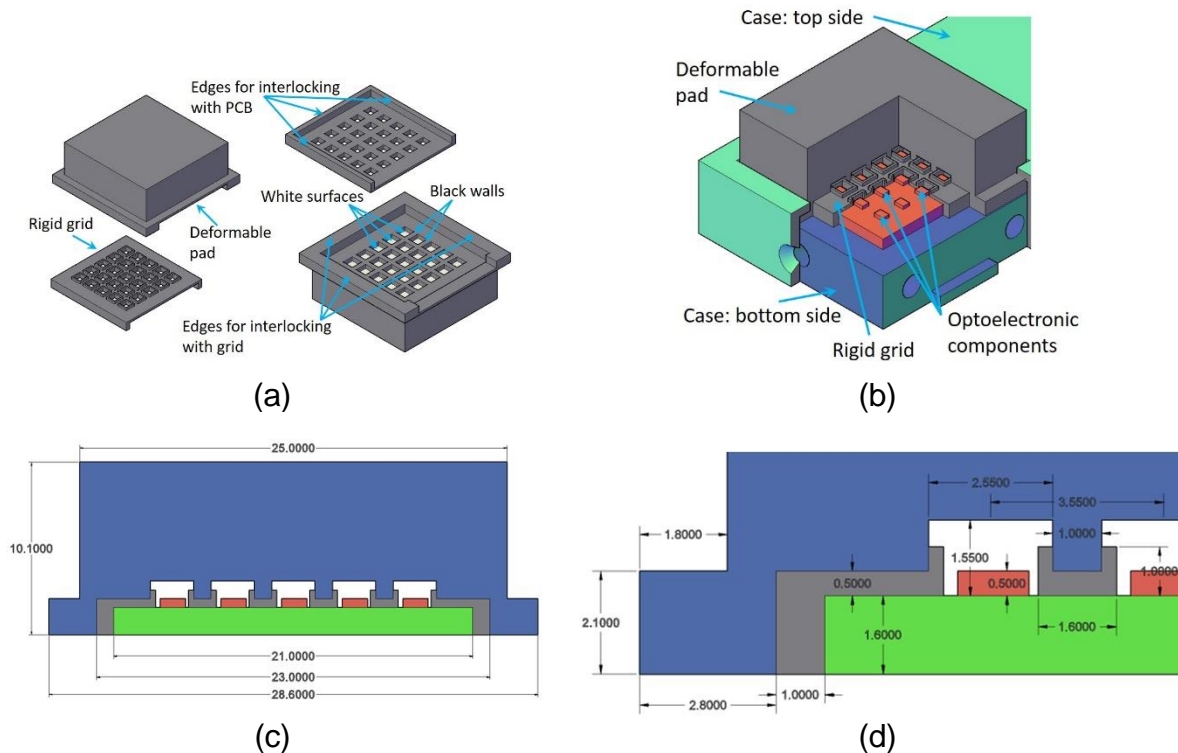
Deformable layer and rigid grid characteristics (a). Mechanical assembly of mechanical and electronic parts (b). Section of the assembled parts with dimensions: full view (c) and zoom view (d).
